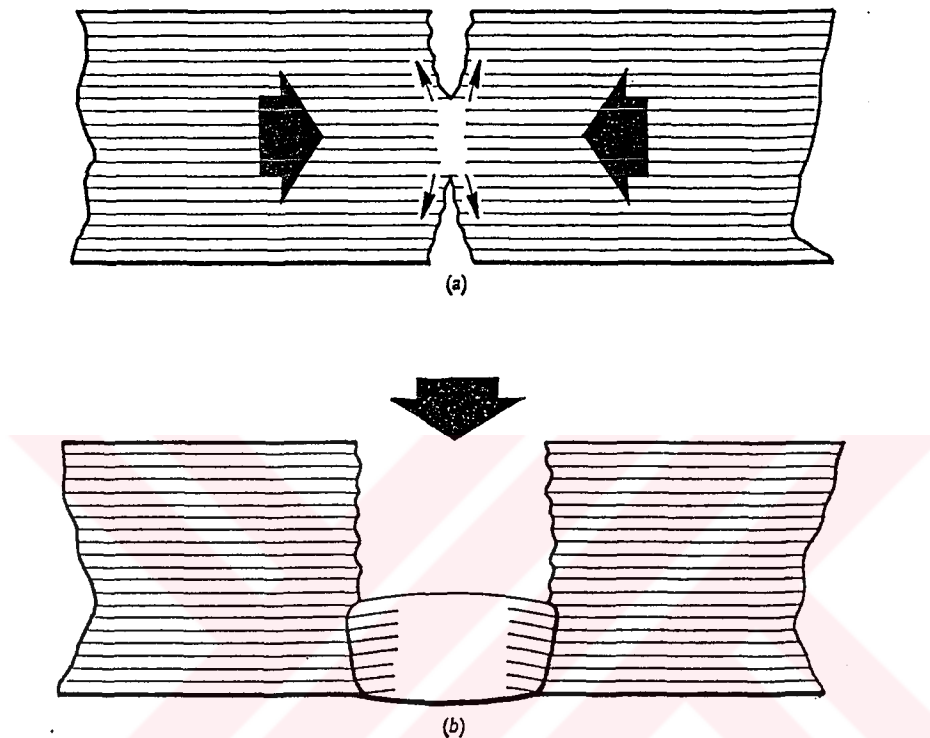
Basic mechanisms of welding. (a) Union by flow. (b) Union by molten metal bridging.
